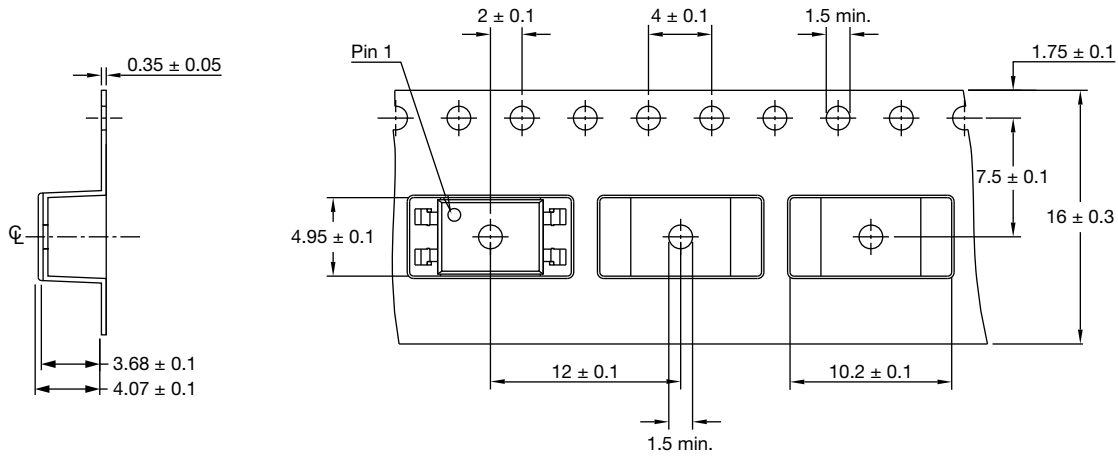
Tape and Reel Packing (1000 pieces on reel)
